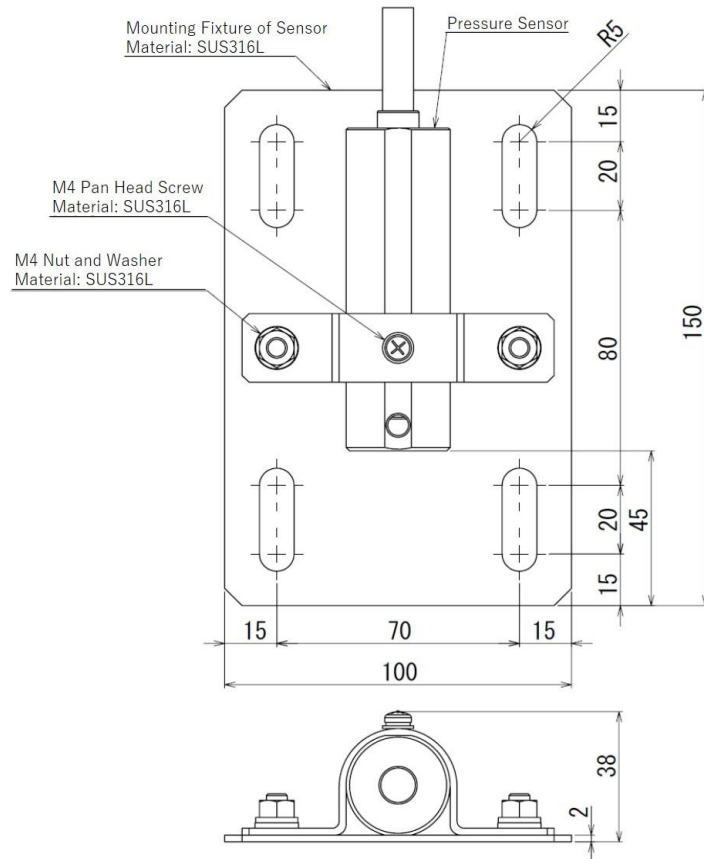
Dimension (Mounting Fixture of Sensor)
